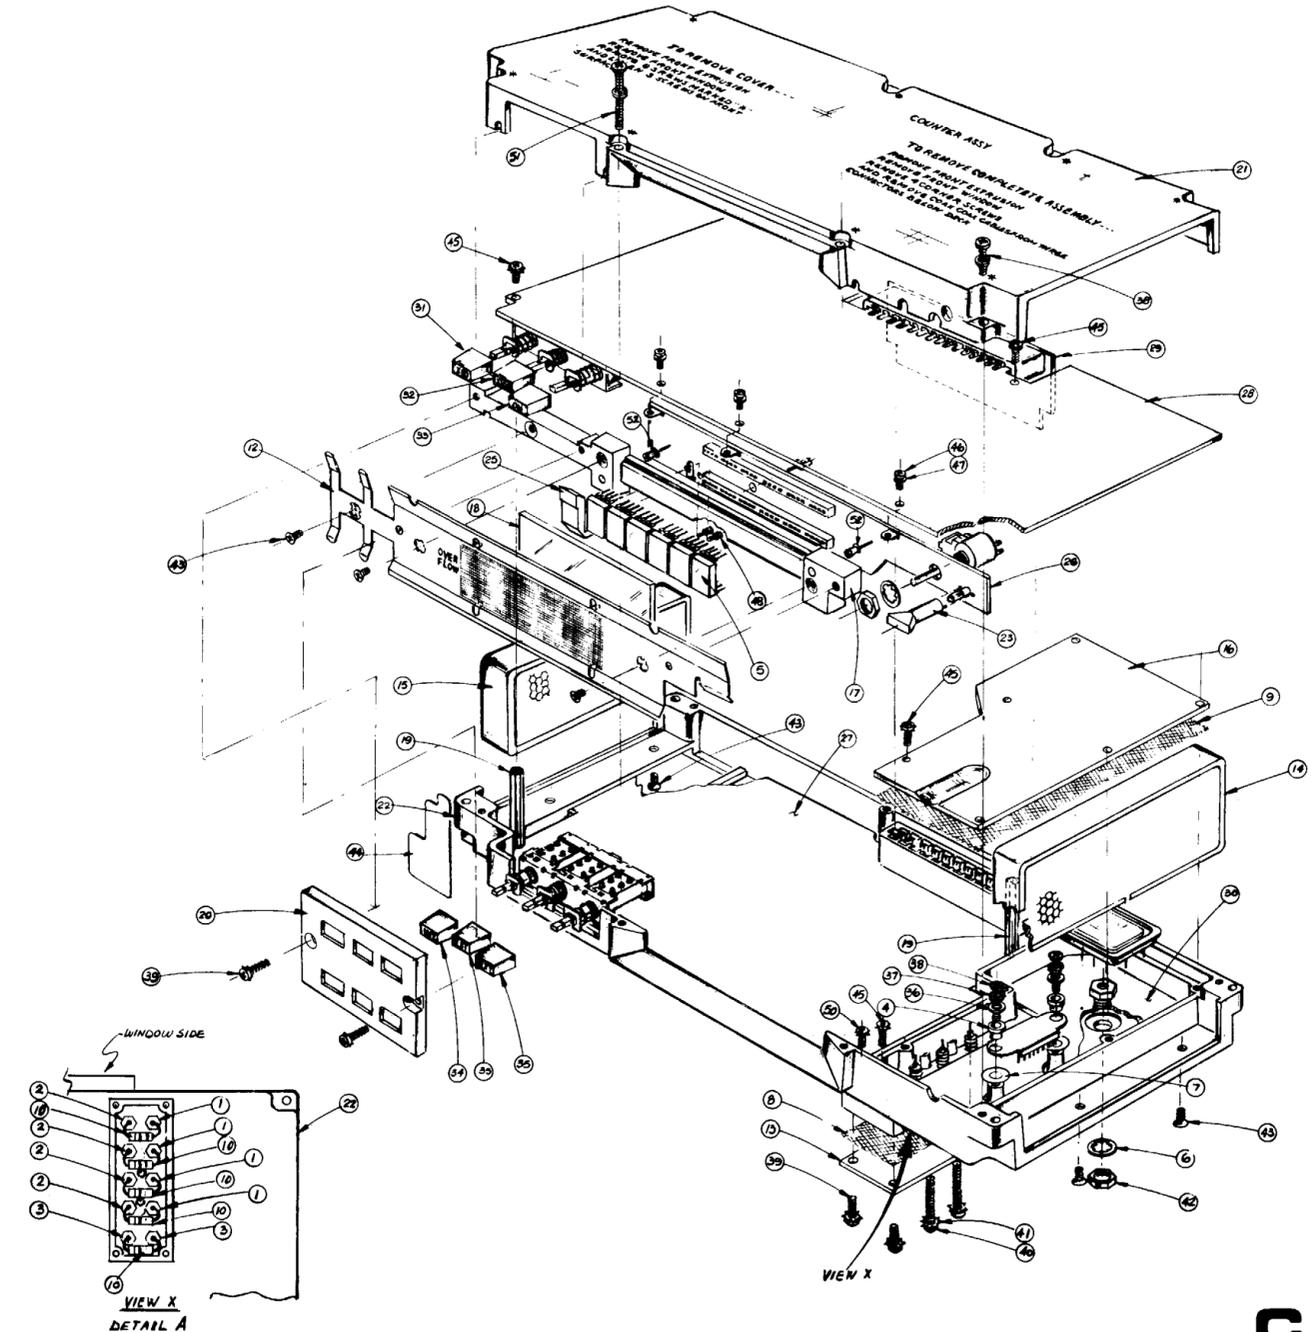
A8 Counter/Lock Assembly Illustrated Parts Breakdown
